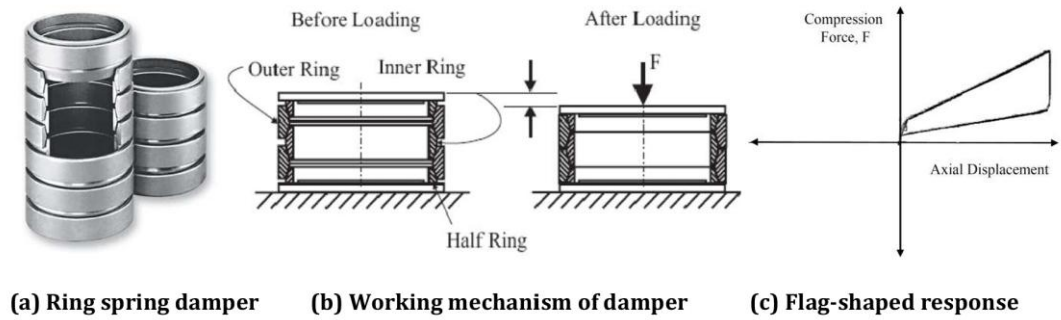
Ring spring damper configuration showing (a) stacked inner and outer rings forming the spring assembly, (b) sliding mechanism along the conical friction surfaces during compression loading, and (c) typical flag-shaped force–displacement response of the device. Adapted from Mashal (PhD thesis) based on Filiatrault et al. (2000)
